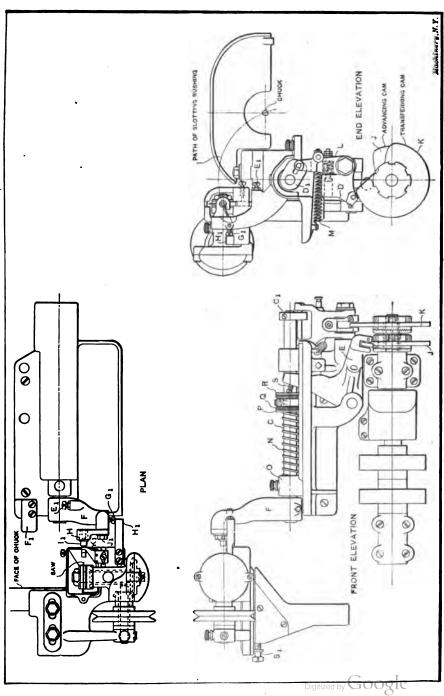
Assembly Views of Screw-slotting Attachment for the No. 00 Brown & Sharps Automatic Screw Machine
